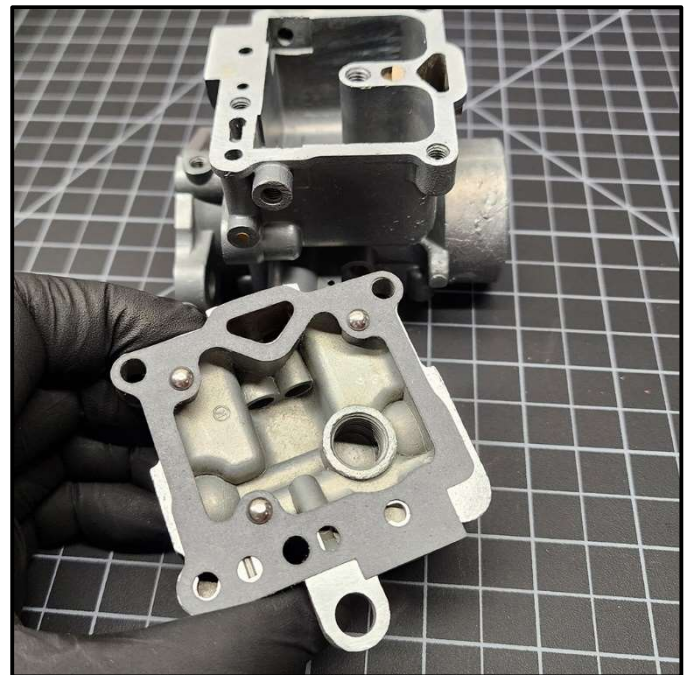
With the gasket installed, the remainder of the carburetor can be assembled.
